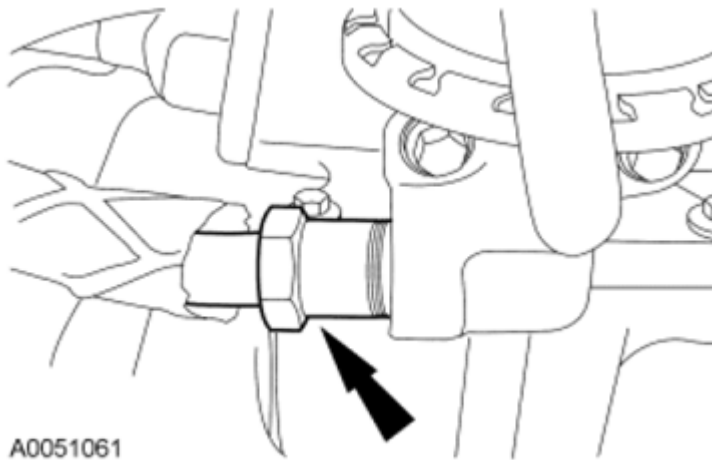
Locating Coolant Outlet Adapter Bolts
